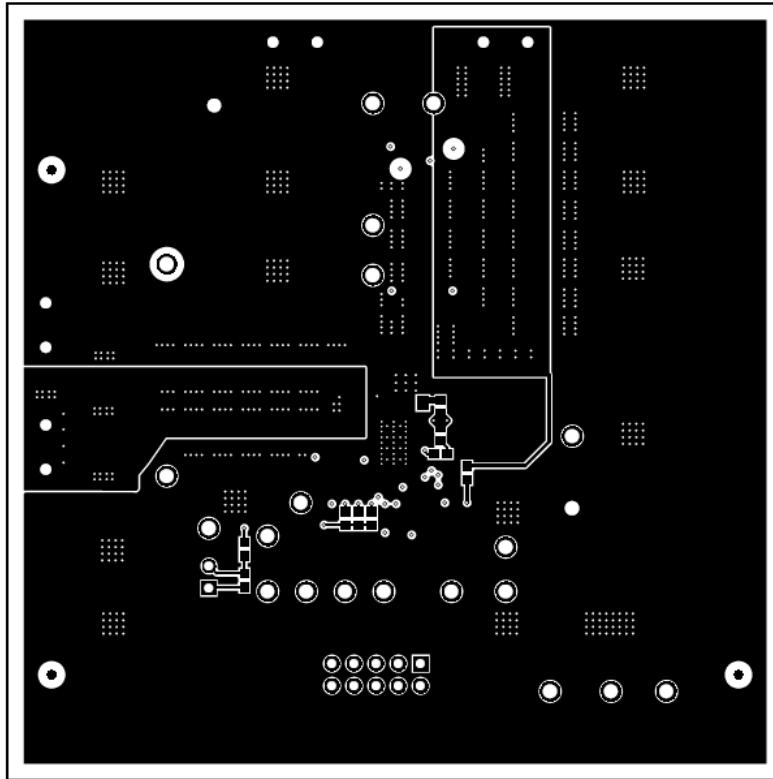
PWR-784EVM Bottom Layer (Top View)
